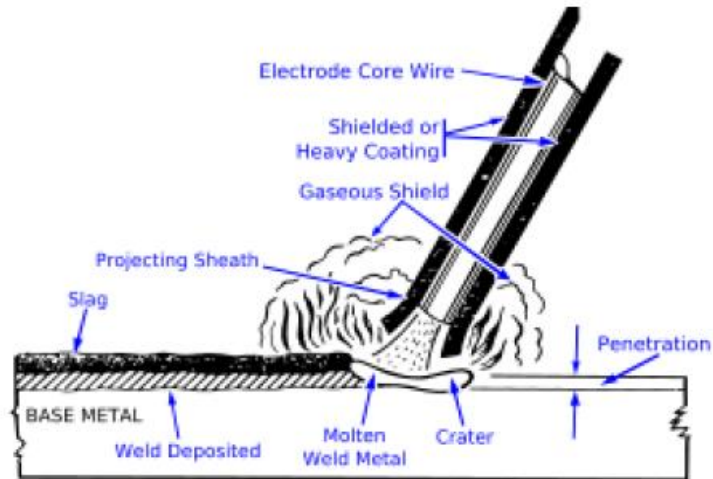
Schematic of Shielded Metal Arc Welding [23]
